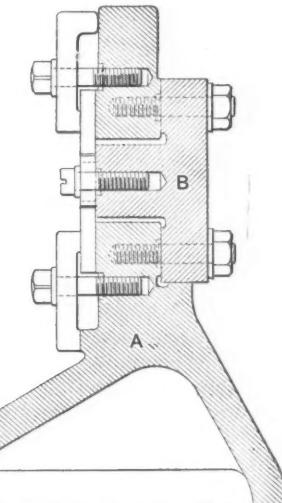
FRONT ELEVATION AND SECTIONAL VIEW OF FIXTURE.
